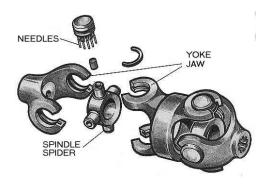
Image of a double Cardan universal joint.<sup>8</sup>
